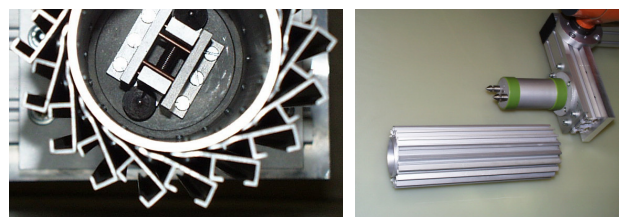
Actual cleaning tool construction (with the cleaning cloths removed).
